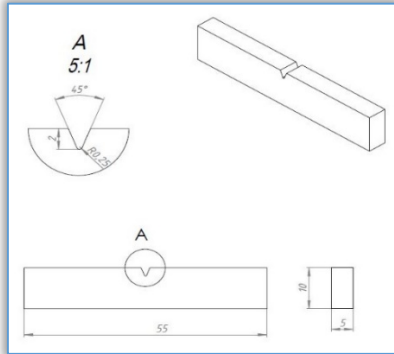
Drawing and 3D view of a Charpy impact test specimen
